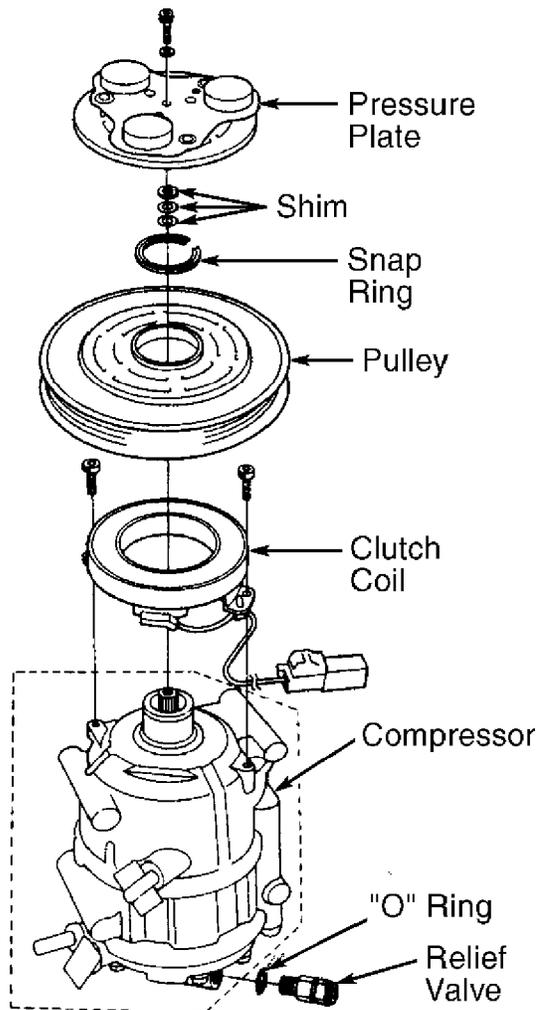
Exploded View Of Compressor Clutch (Ford FX-15)
